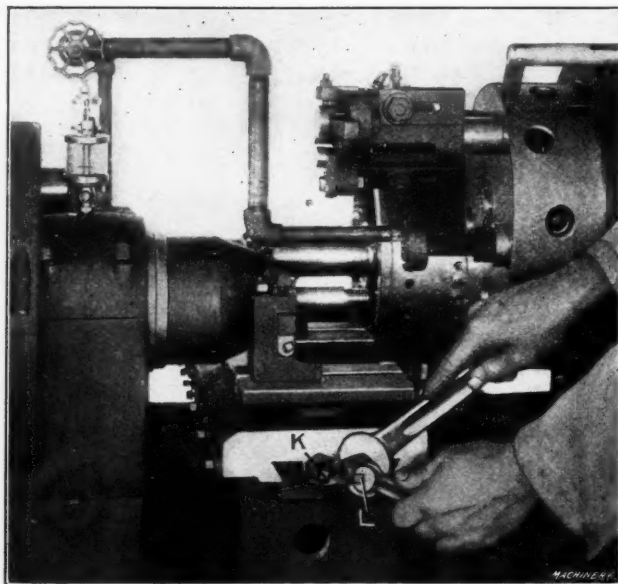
Accurate Forming is secured by adjusting the Cross-slide Stop-screws
